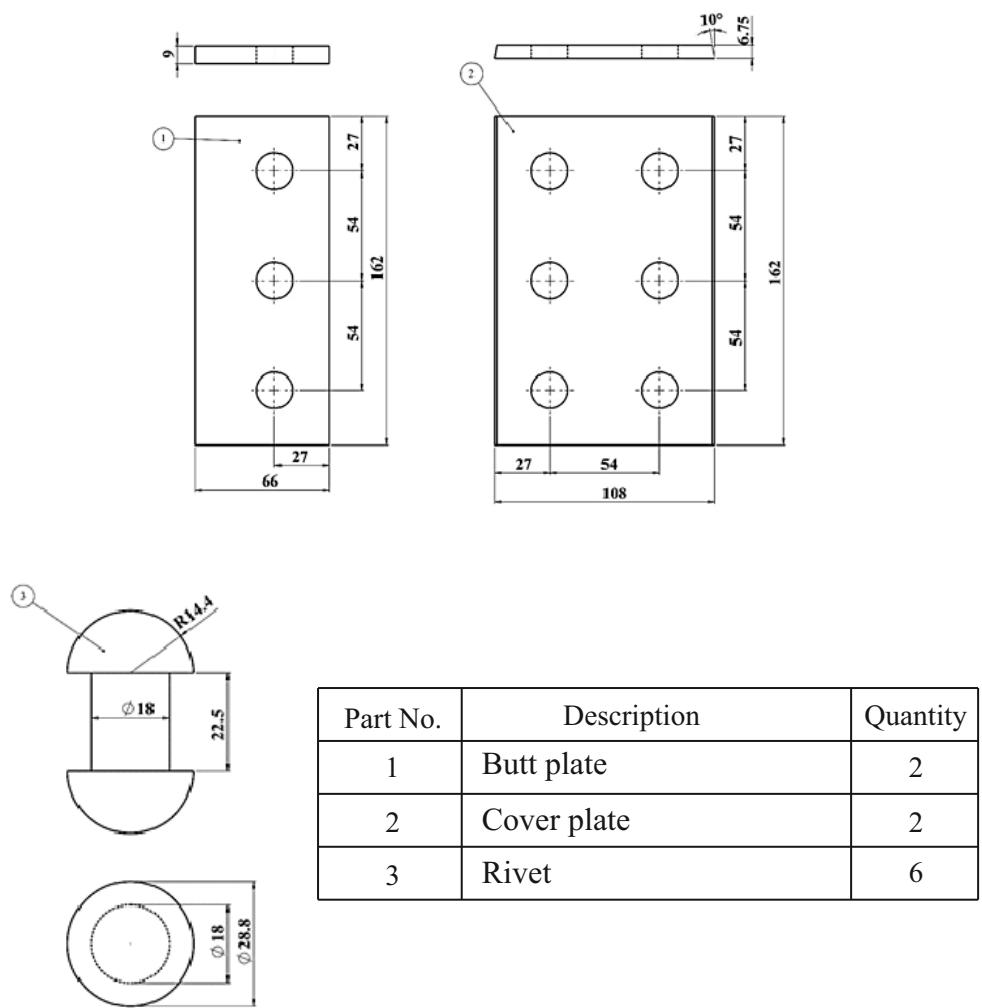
Part drawings of Single riveted butt joint with double cover plate.
